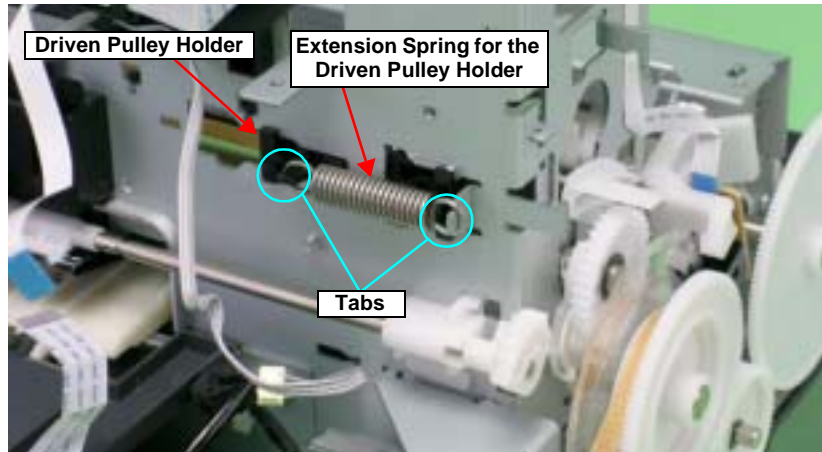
Removing the Extension Spring for the Driven Pulley Holder
